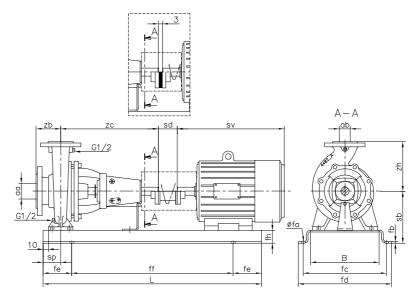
Dimensions pump + electric motor, with spacer-coupling or standard coupling (insert)
